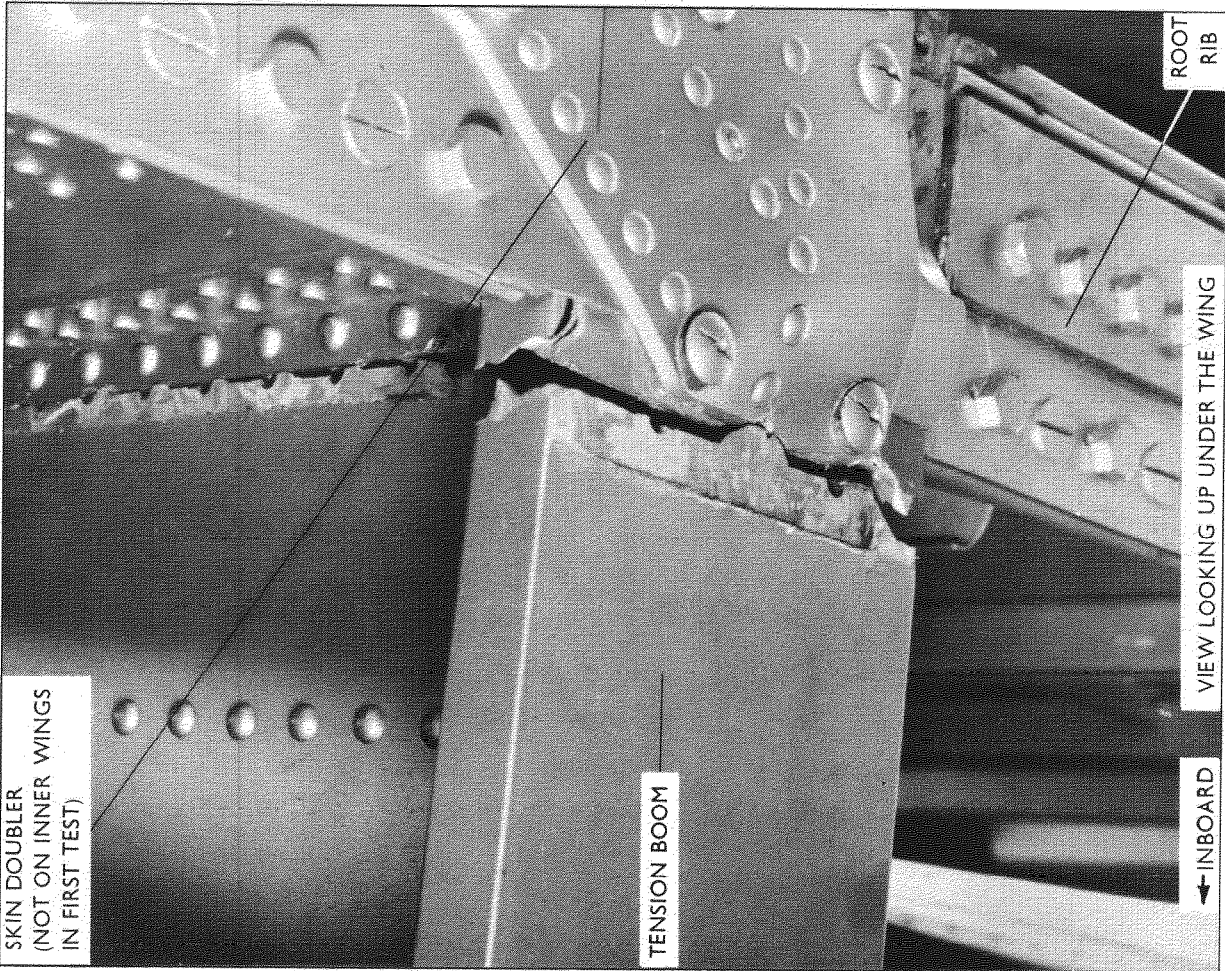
STARBOARD INNER WING; 180,500 LOAD CYCLES, SECOND TEST
